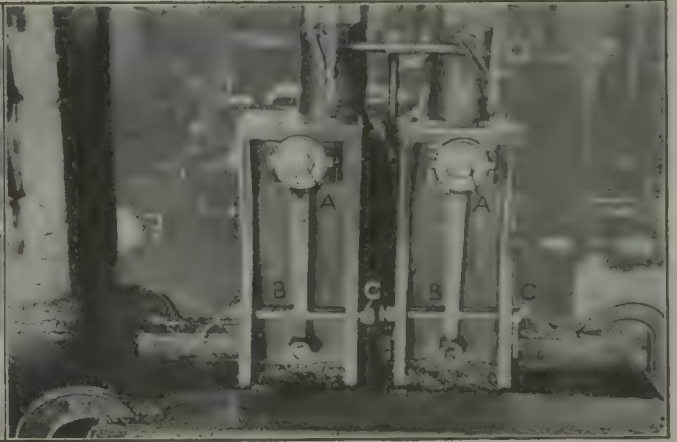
DRILLING BOLT HOLES IN CONNECTING-RODS
